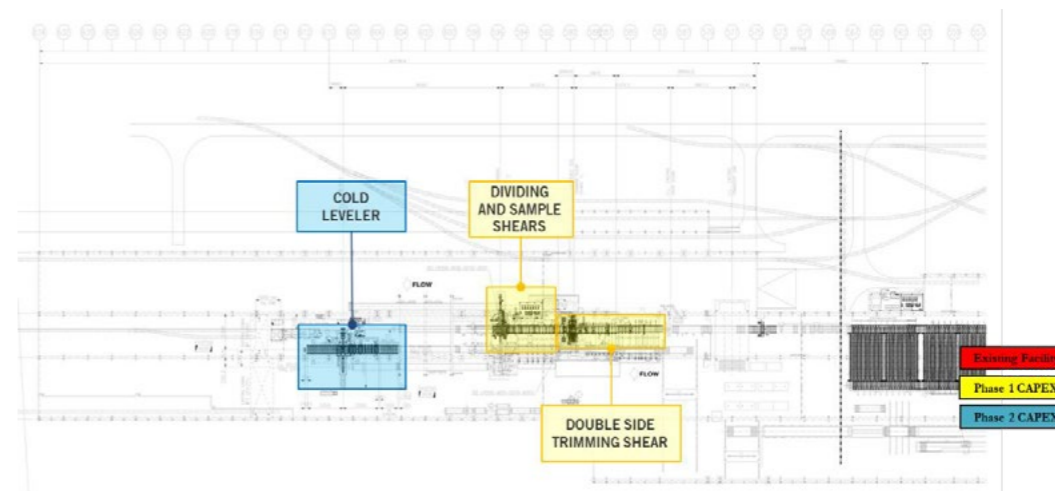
B: JSW Steel USA – Baytown Layout – Plate finishing line
